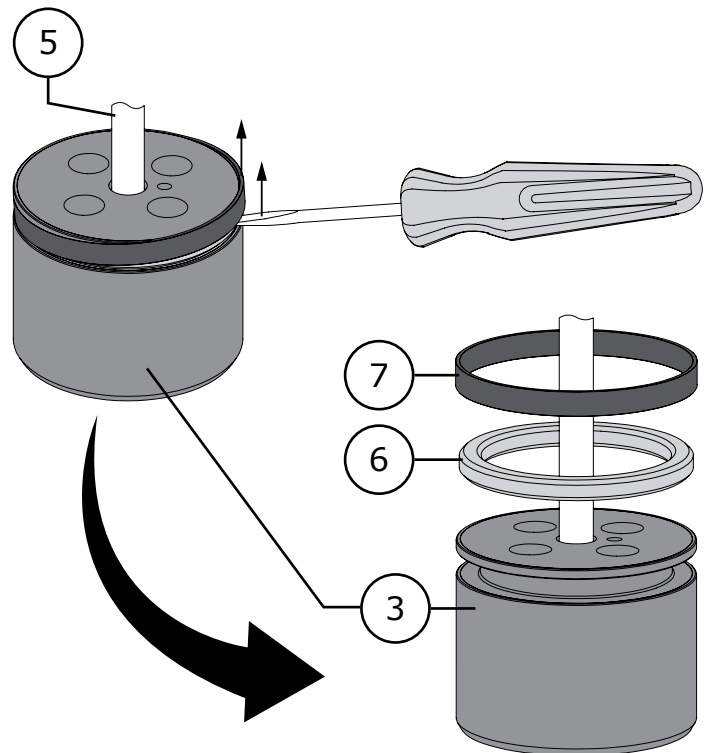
Two-Piece Plug Seal Ring Removal (Model 360)
